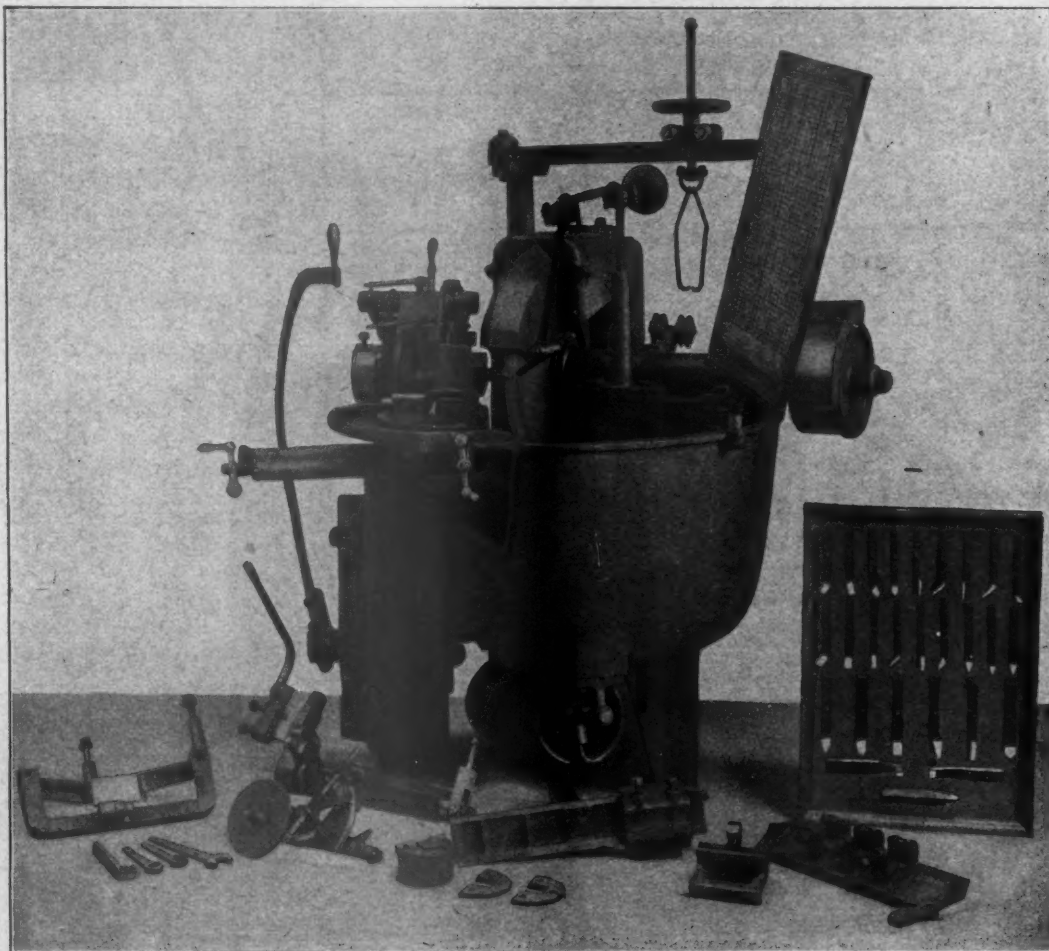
UNIVERSAL TOOL-GRINDING AND SHAPING MACHINE. WILLIAM SELLERS & COMPANY.
